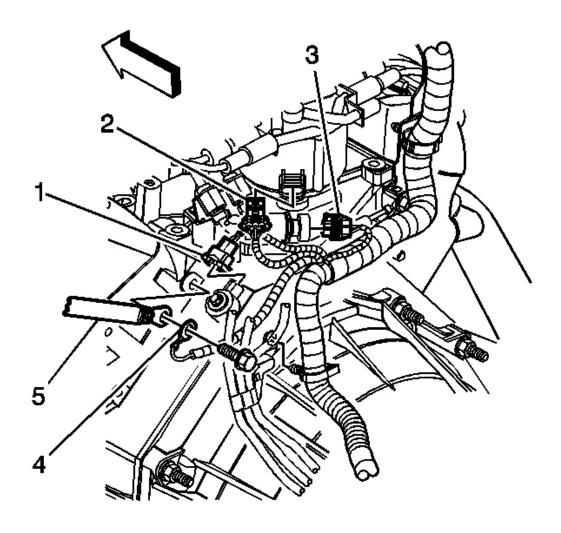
View Of Engine Wiring Harness & Components Courtesy of GENERAL MOTORS CORP.
